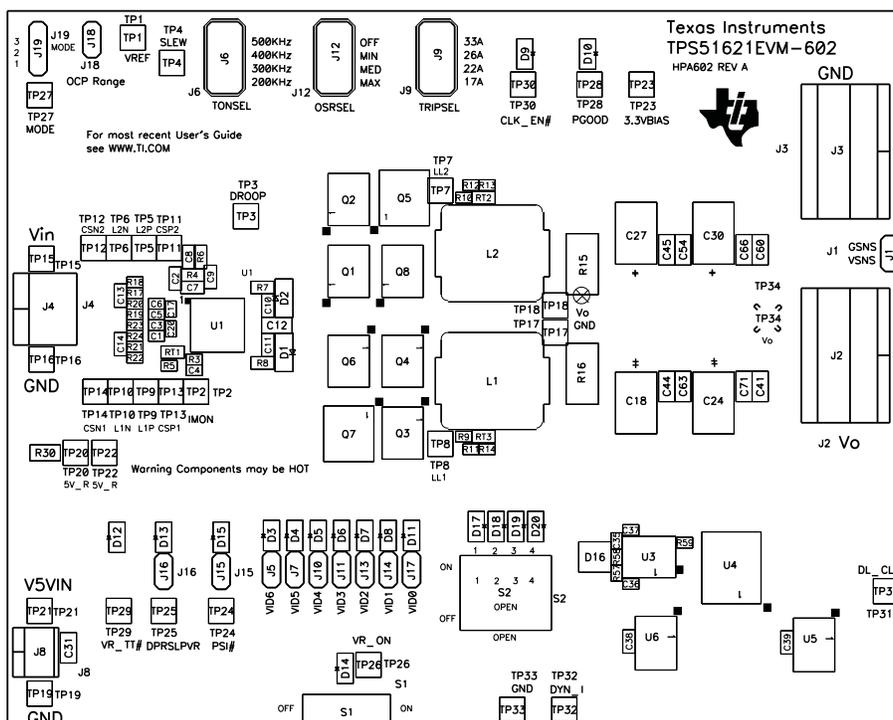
TPS51621EVM-602 Top Layer Assembly Drawing, Top View
